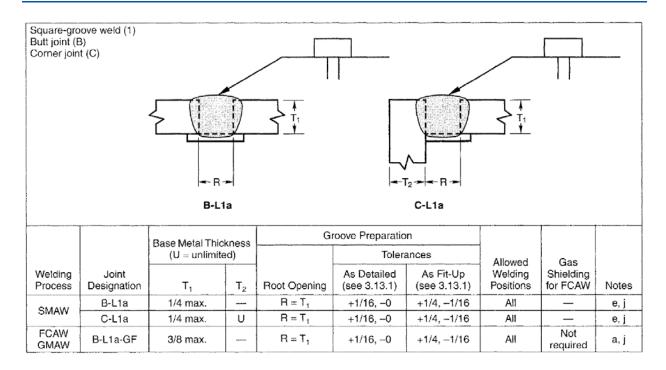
AWS D1.1 Figure 3.4 – Prequalified CJP Groove Welded Joint Details
